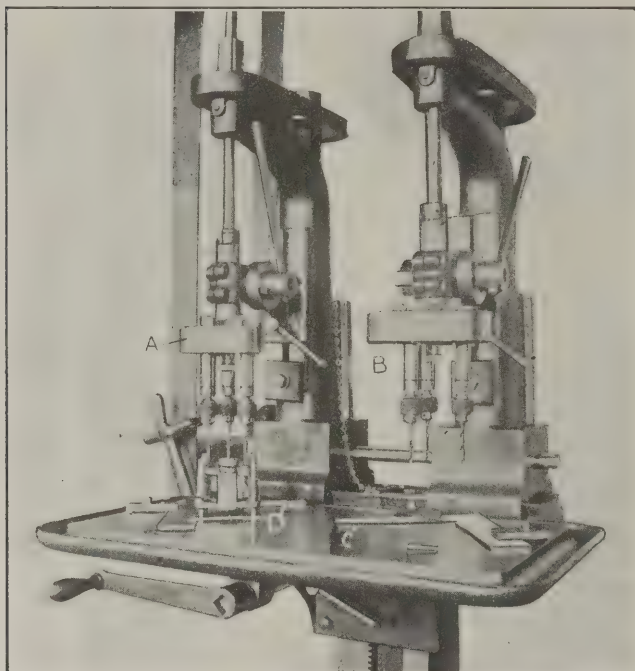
Drill Press equipped with Two Three-spindle Drilling Attachments
